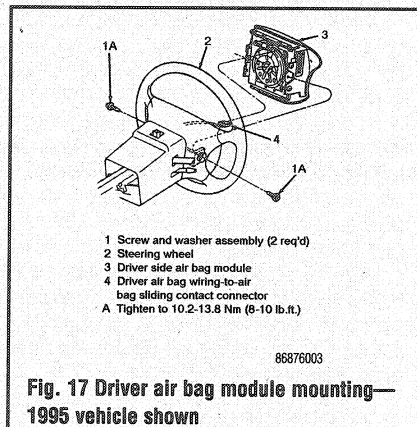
Driver air bag module mounting—1995 vehicle shown
